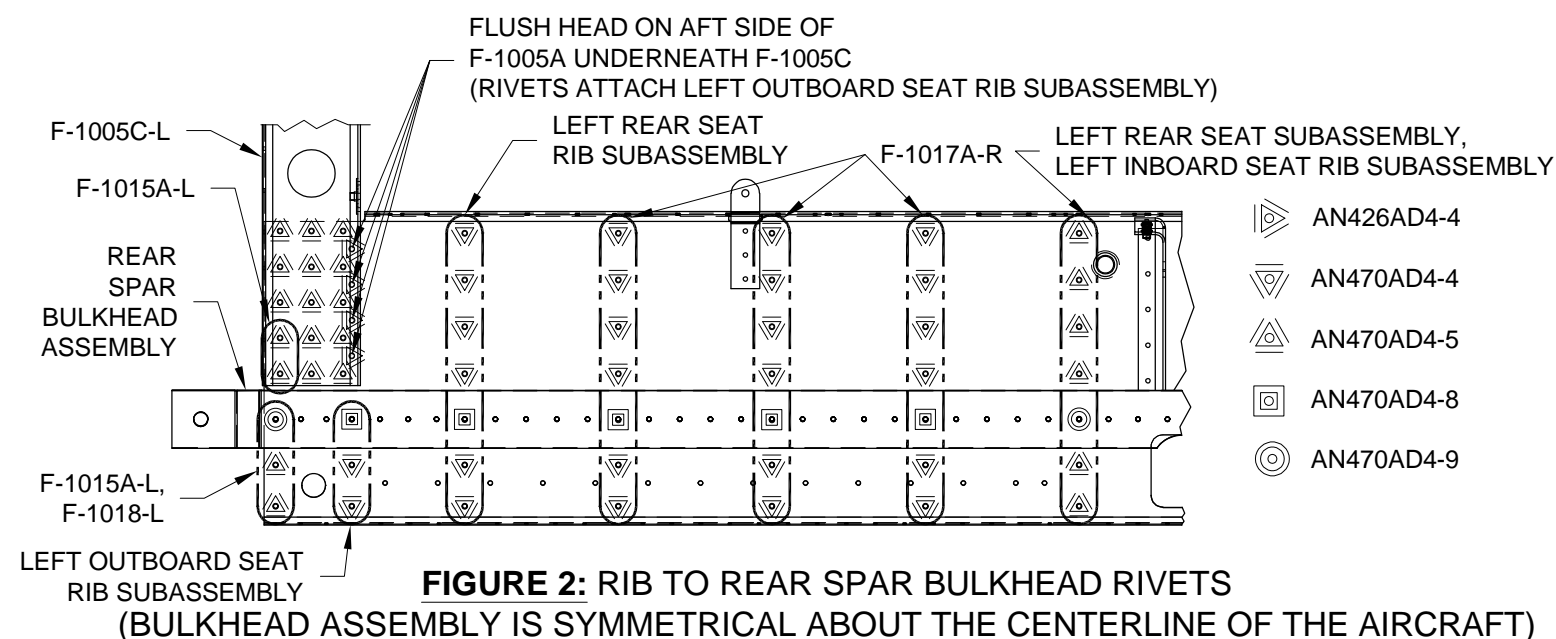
RIB TO REAR SPAR BULKHEAD RIVETS
